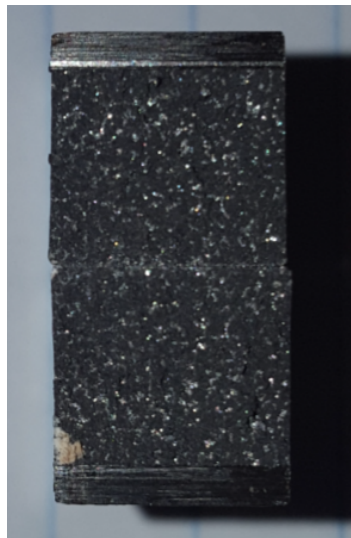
The brittle fracture surface of the fracture test performed on the material sample of the casting performed with the EPS pattern
